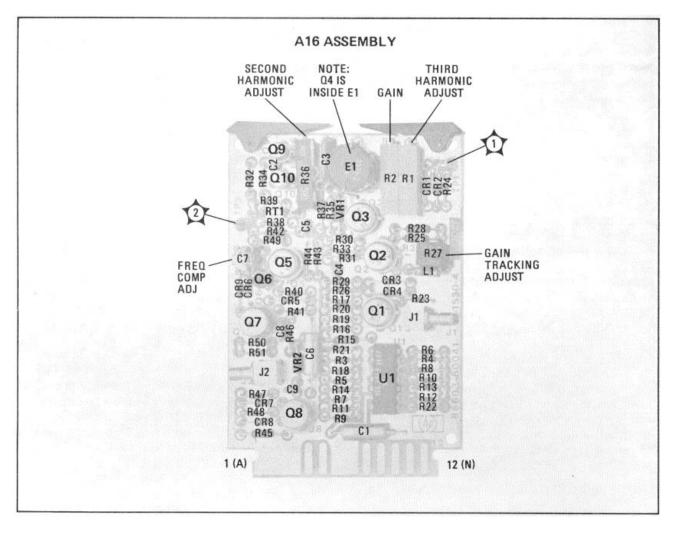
A16 Phase Modulator Driver Assembly Component and Test Point Locations
